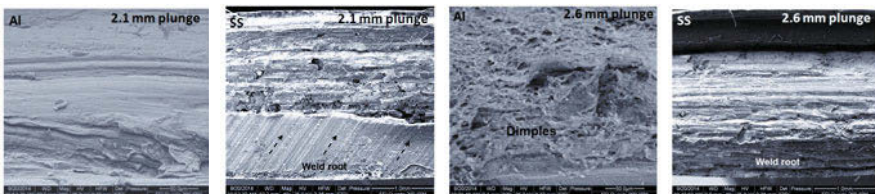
Fracture surfaces of SS and Al sides.
